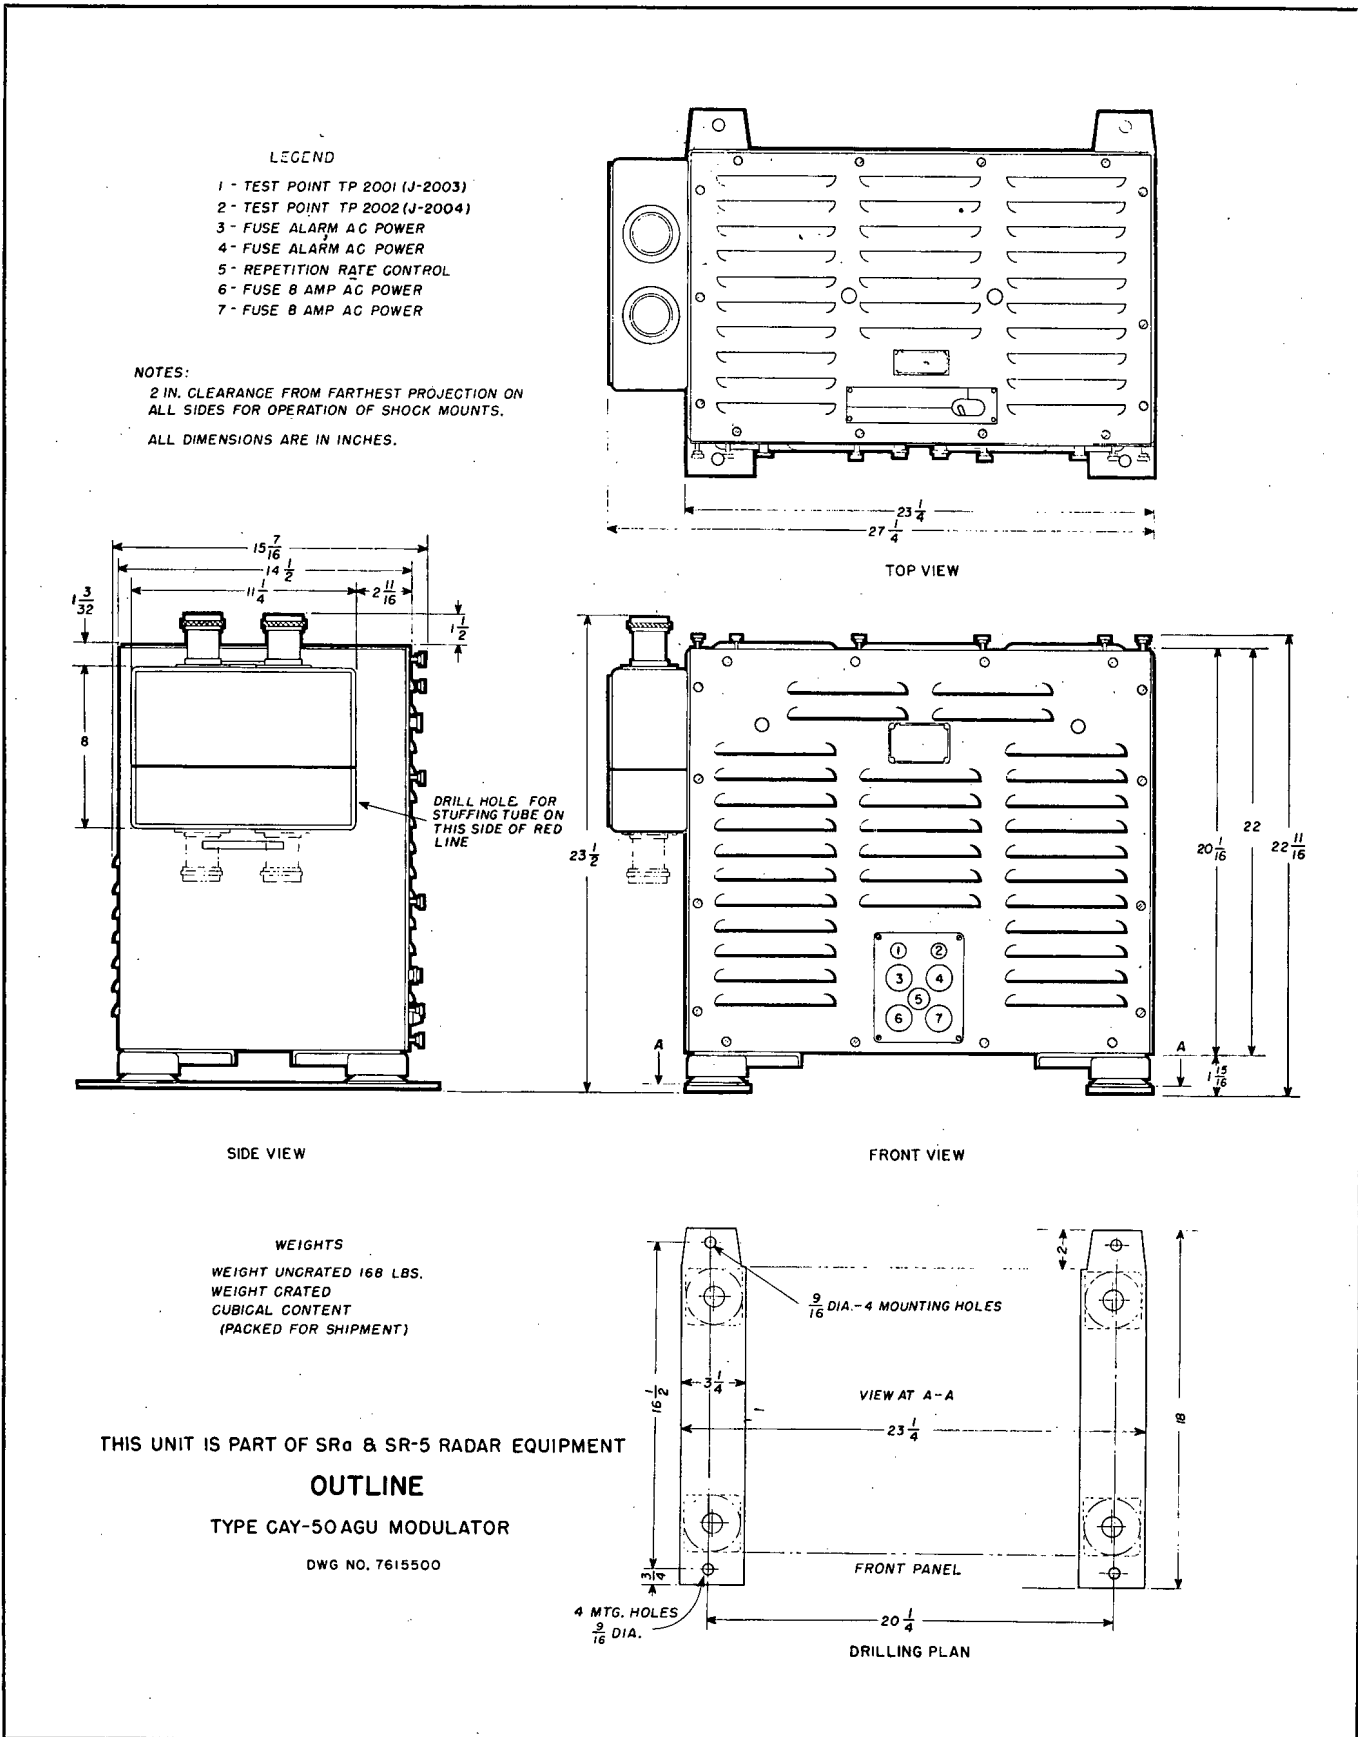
Modulator CAY-50AGU, Outline and Mounting Dimensions
